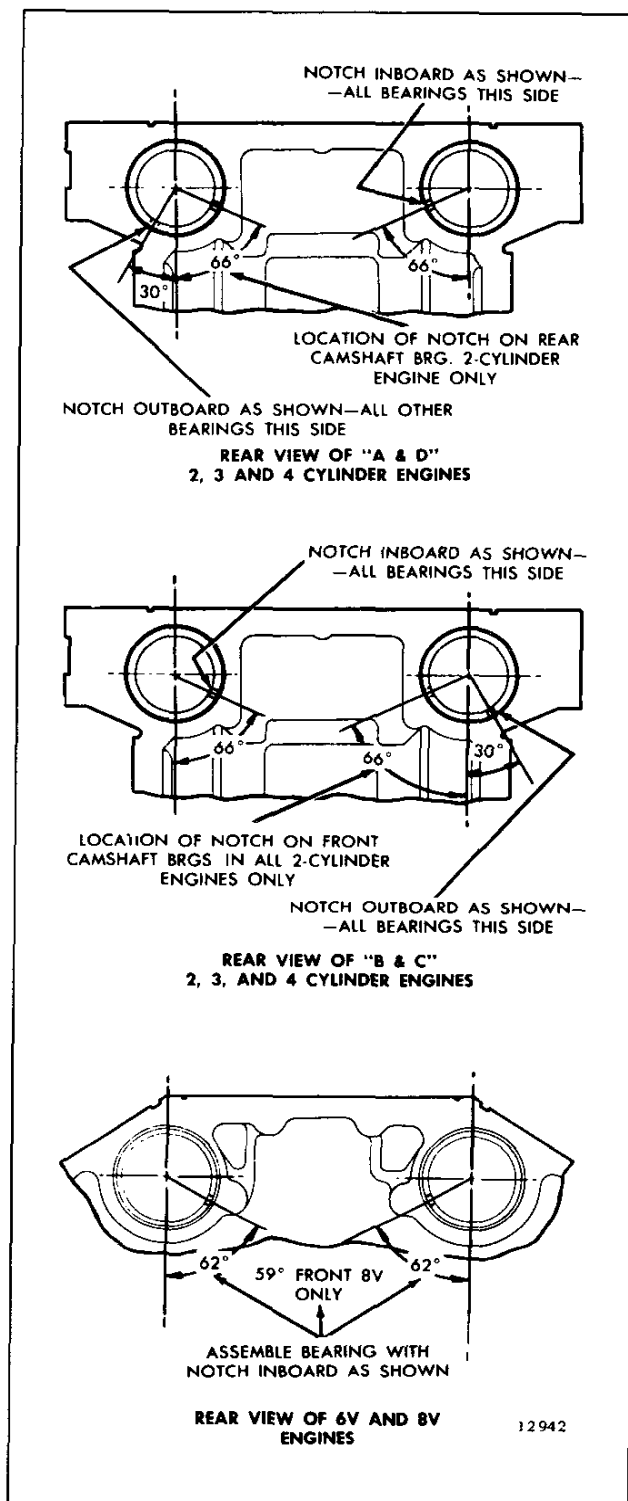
Location of Notch in Relation to Shaft Bore Centerline
